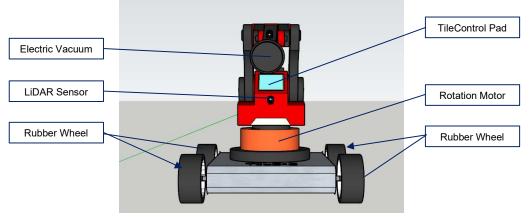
The component in the body part of the Tiles Installer Robot from the front view
